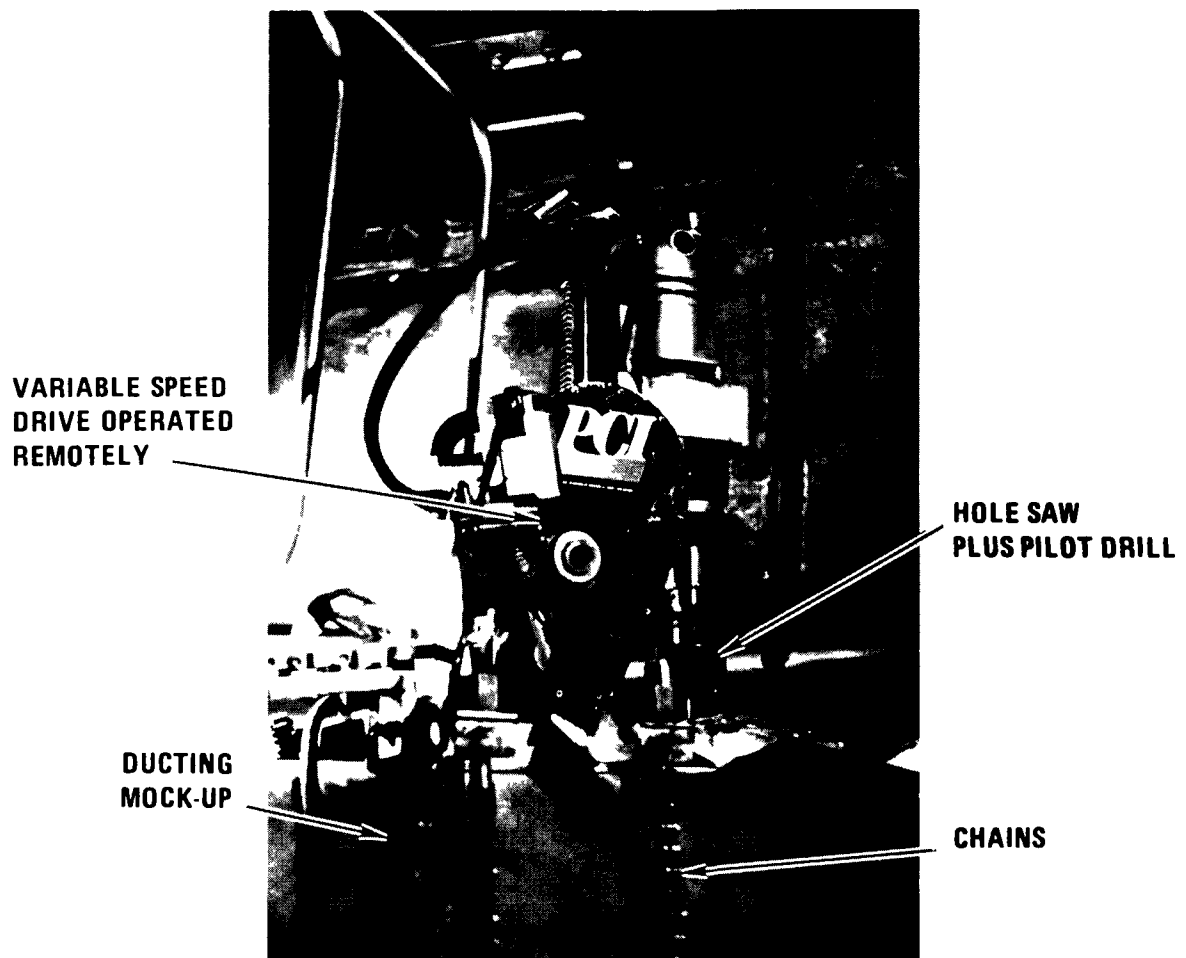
Trepan cutting tool mounted on ducting mock-up
